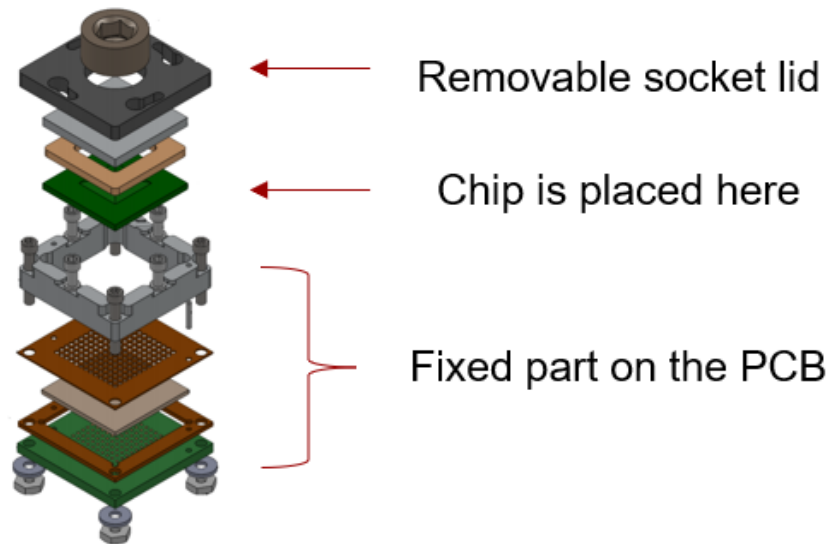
A BGA socket that allows testing multiple chips on a single PCB [16]
